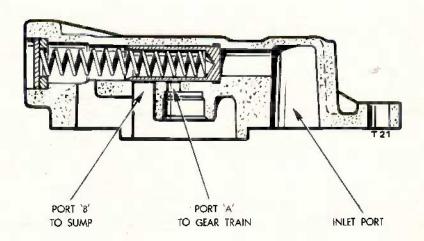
SECTION VIEW OF LOW PRESSURE VALVE
